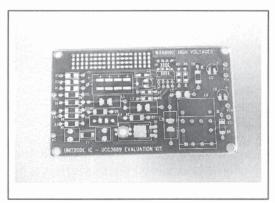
UCCC3889 Demo Kit PC Board - SMT and/or thru-hole
